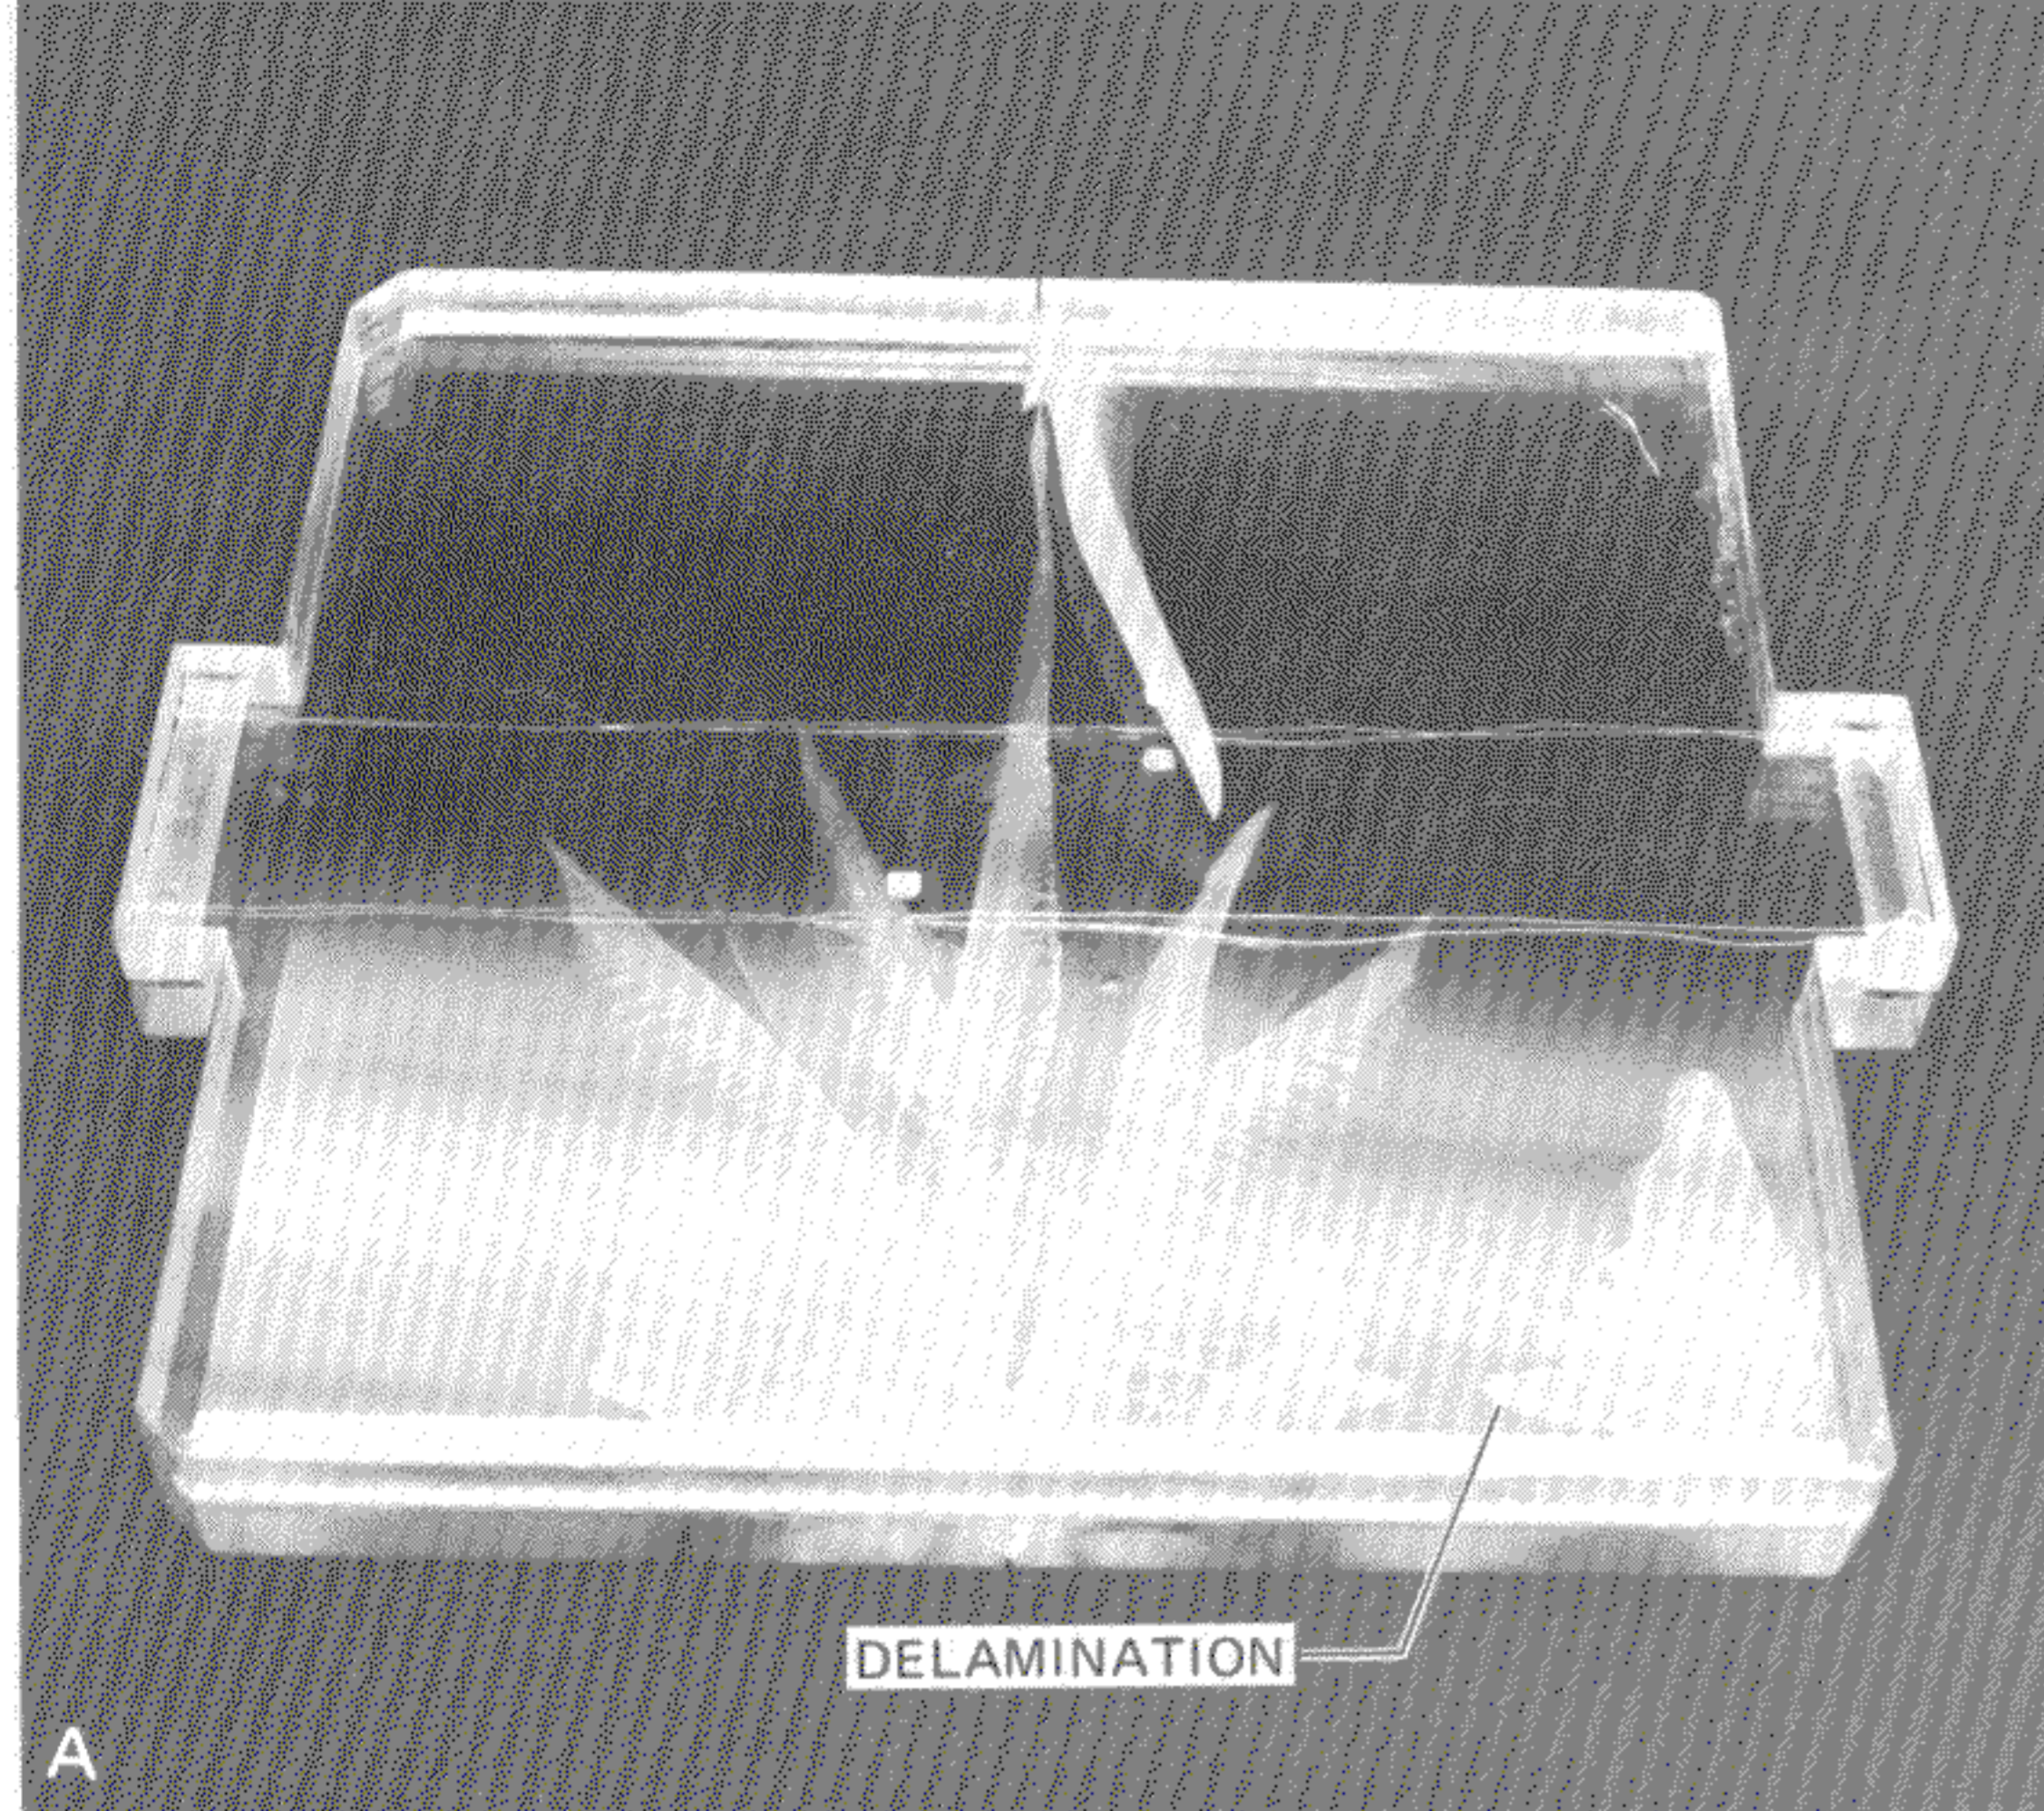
Windshield Side Panel Test Specimens showing Delamination, Interlayer Tears, Cracks, and Interlaminar Checks
